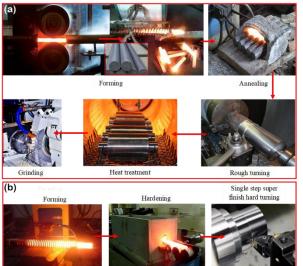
(a) Technological chain for conventional production process, and (b) hard turning production [4]
